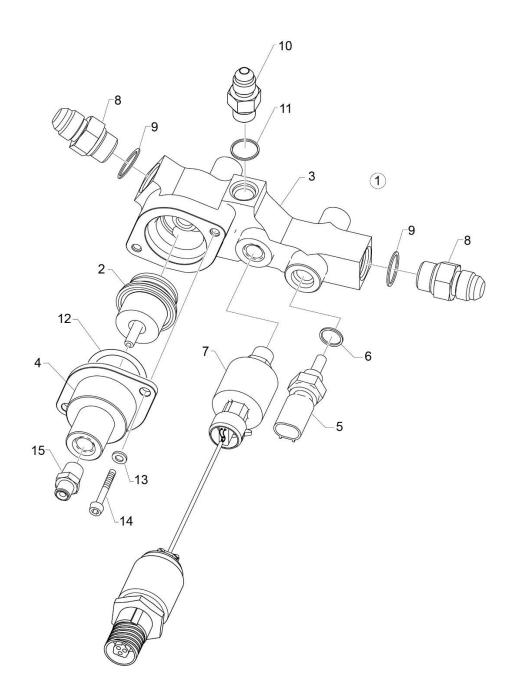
Fuel Injector, Fuel Lines, Manifold Assembly, and Pressure Line (Cont.)
